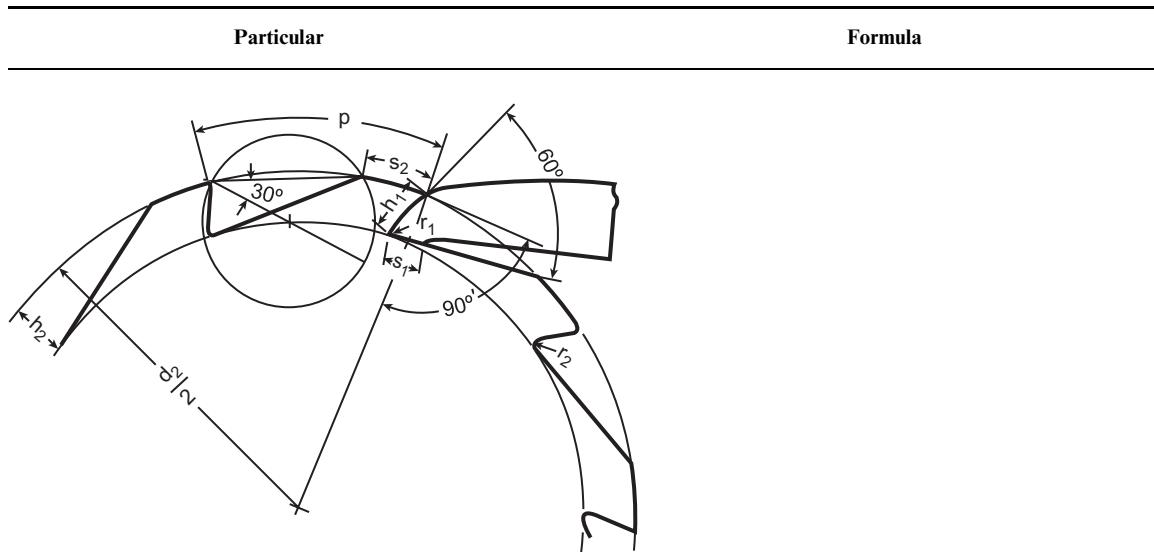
Definitions and dimensions of ratchet wheel.
